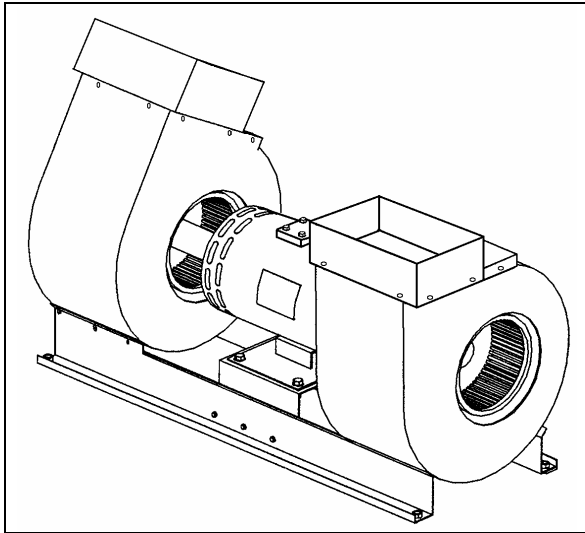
EVAPORATOR MOTOR ASSEMBLY 22208
